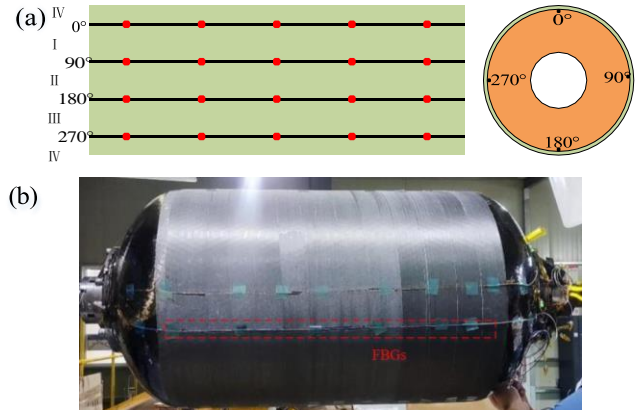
SRM Composite Housing Sensor Placement. (a) Distribution of sensors in the composite shell; (b) Actual implant drawing of the SRM case sensor.
